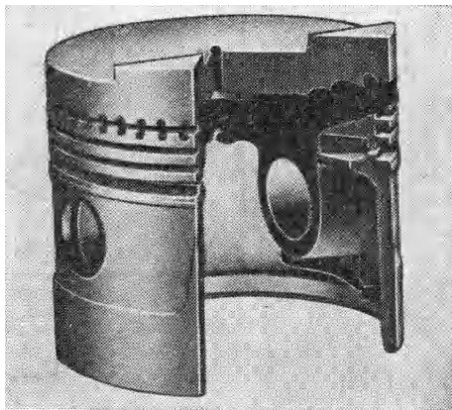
Piston with top ring groove reinforced by steel helical wire
